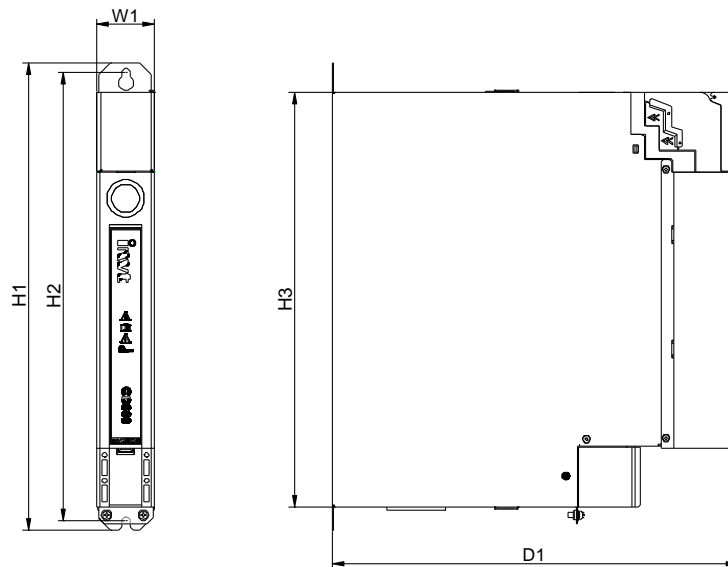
Wall-mounting drawing for the 380V 1.5–7.5kW inverter units
